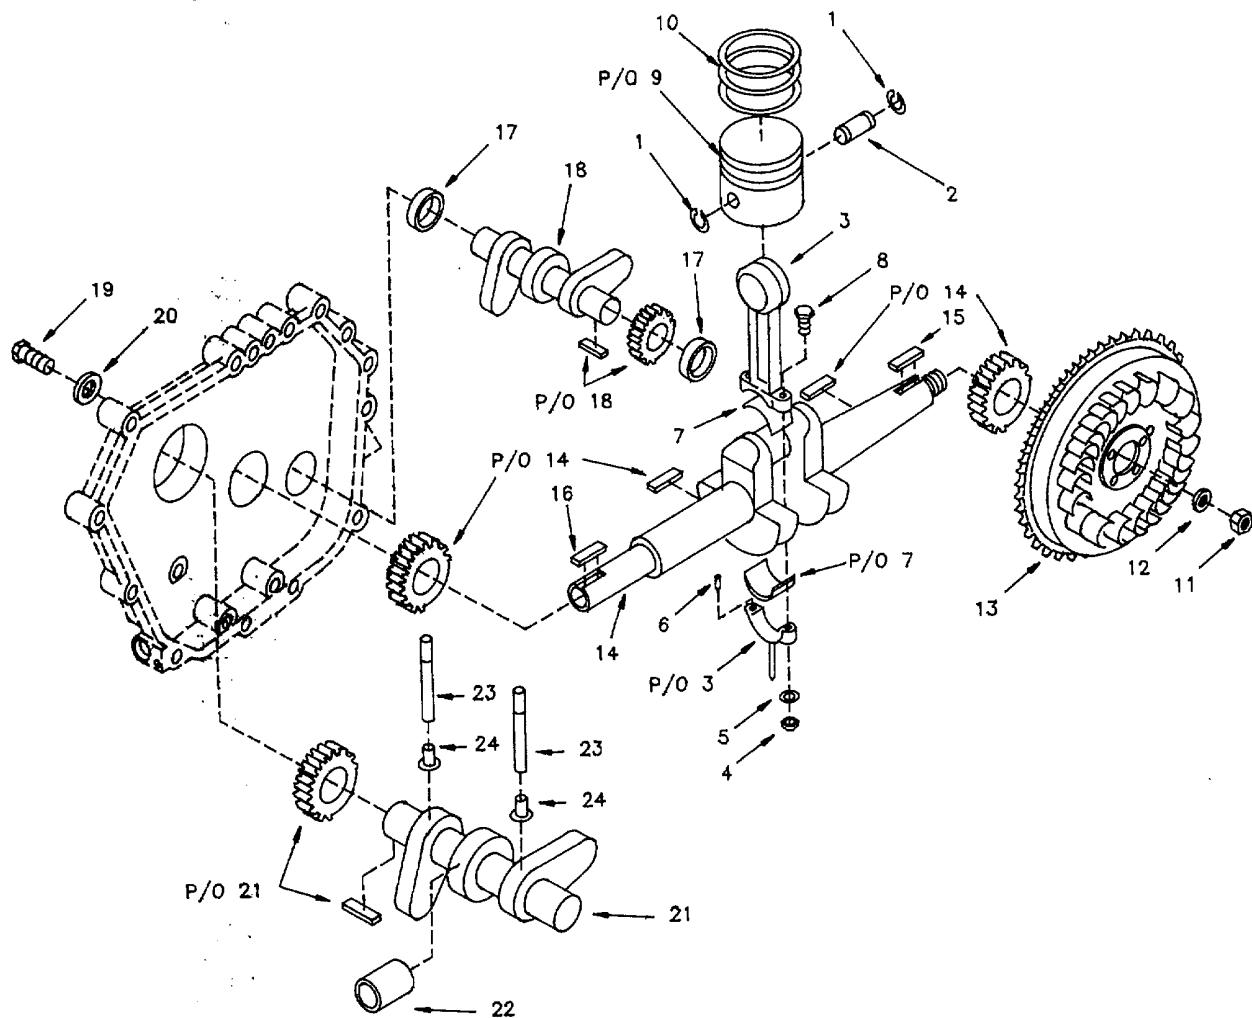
Cam Shaft, Balancer Shaft, Crank Shaft, Piston, and Rod Assembly
